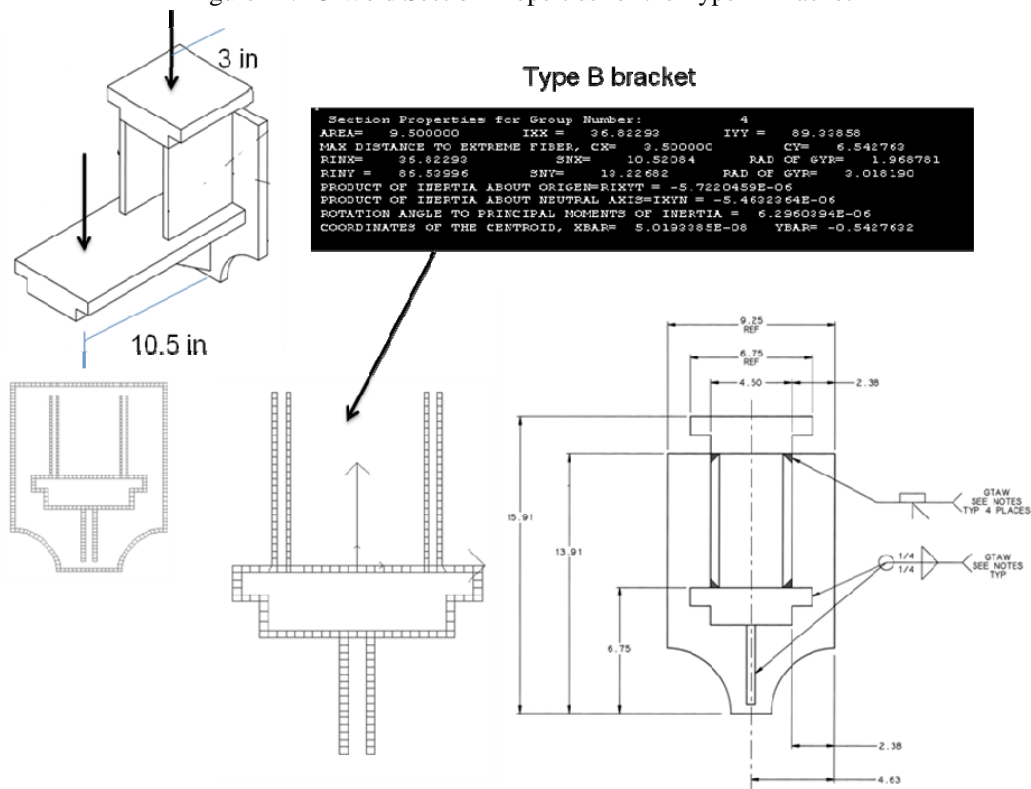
Weld Section Properties for the Type B Bracket
